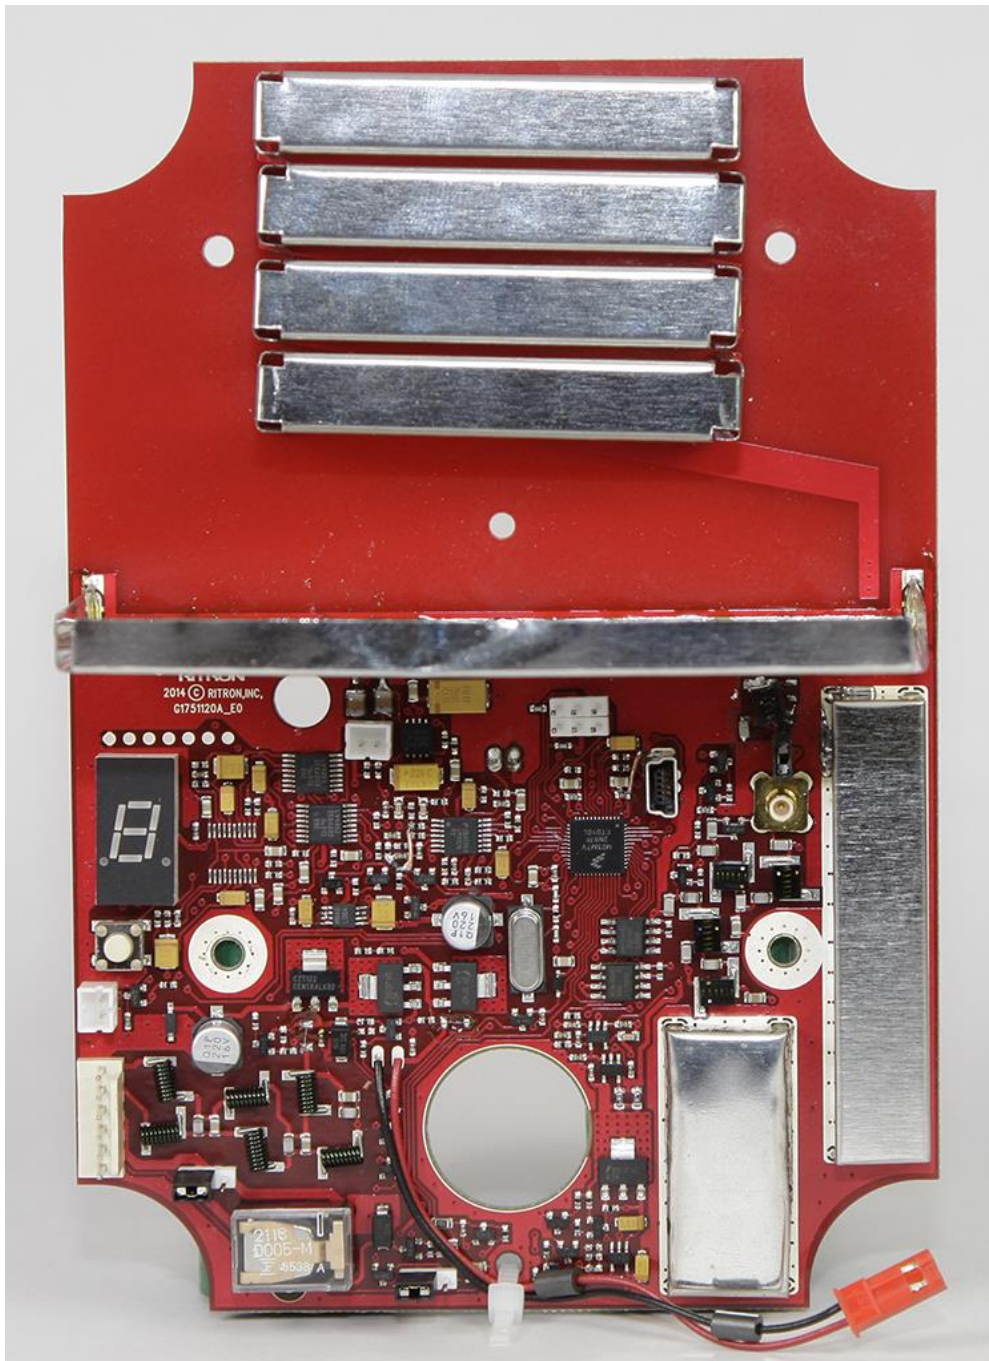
M complete top side PCB assembly with shields and internal antenna installed
